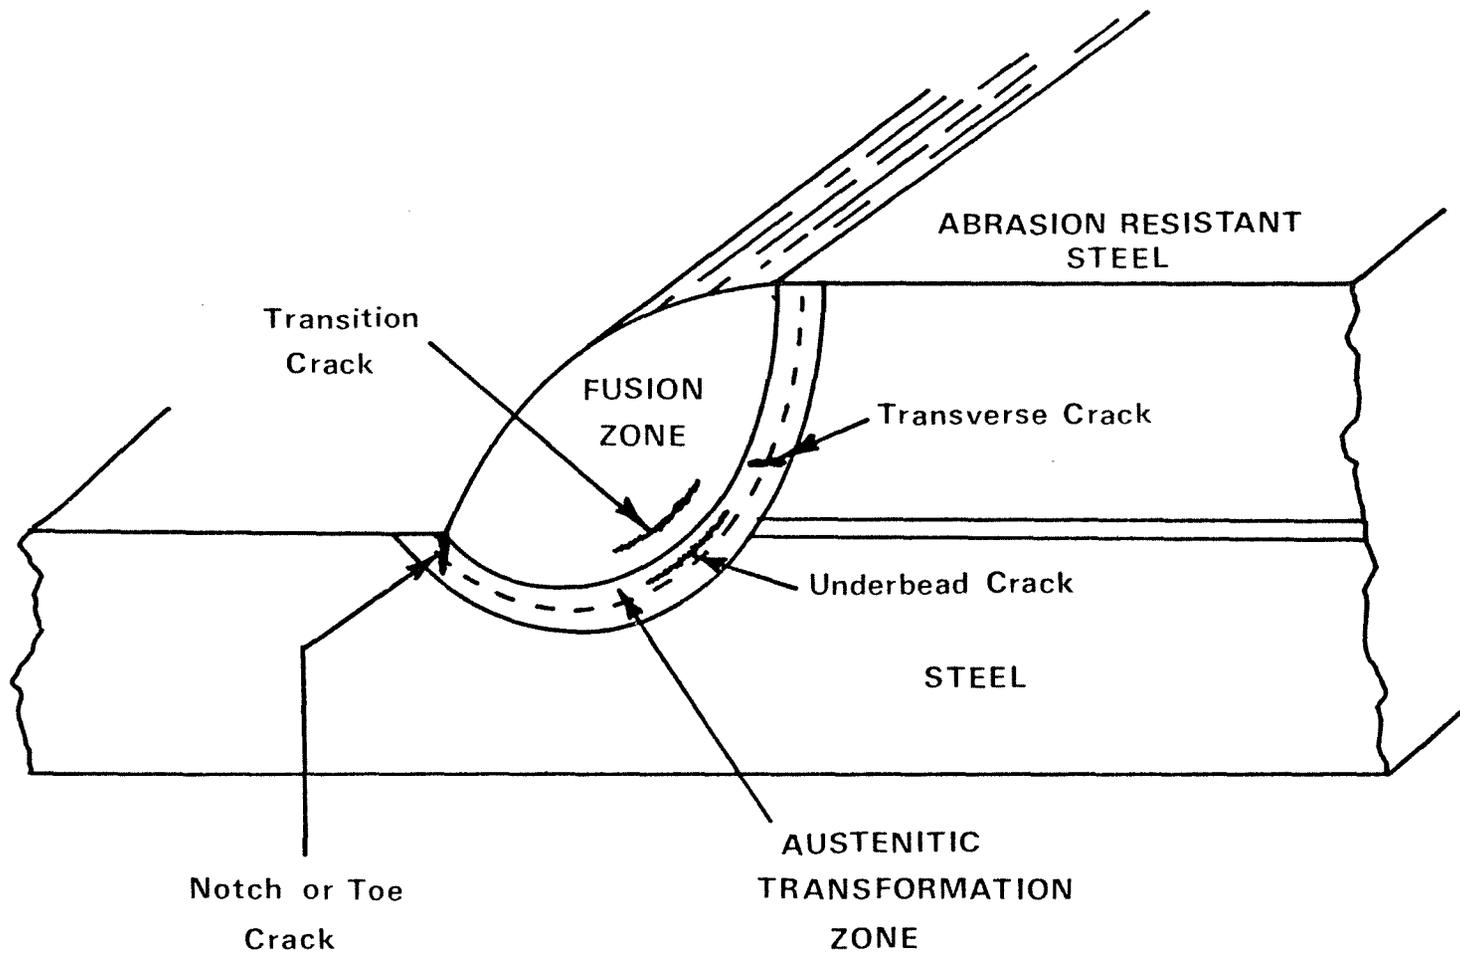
Types of cracking associated with abrasion resistant steel weldments.
